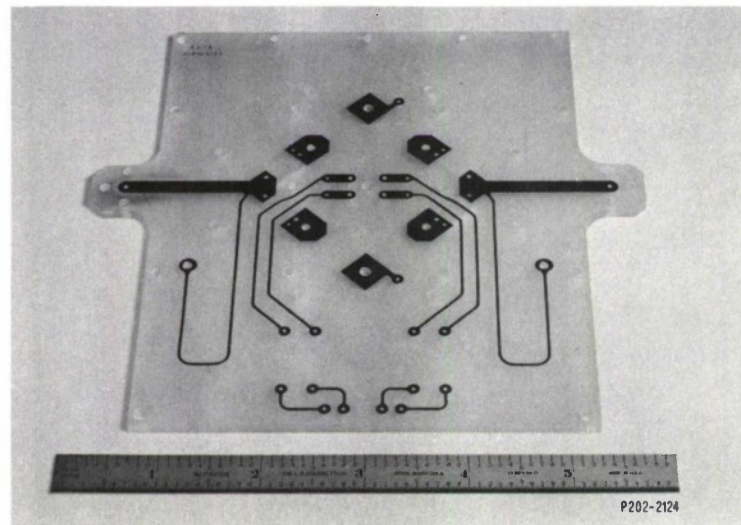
Rexolite board with circuit of 2P2T section etched on copper clad after machining.
